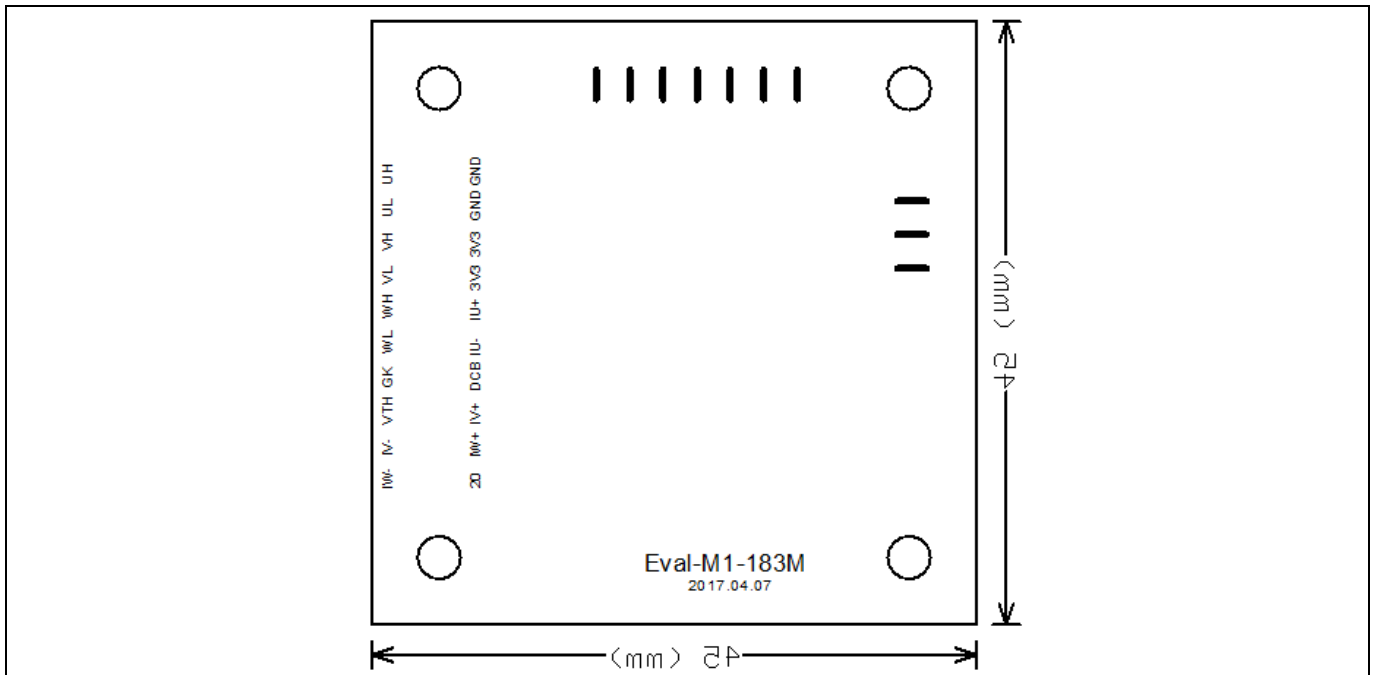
Bottom overlay print of the Eval-M1-183M evaluation board
